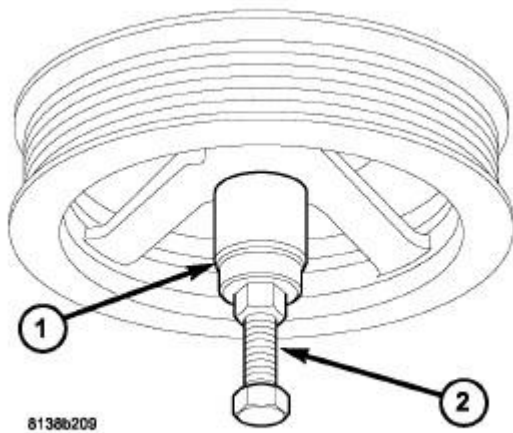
CRANKSHAFT DAMPER - INSTALLATION
